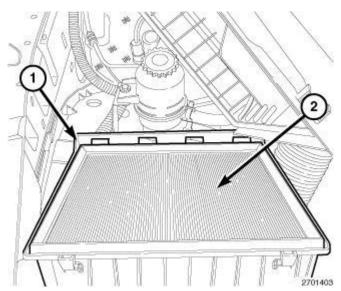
Air Cleaner Housing & Air Cleaner Filter Courtesy of CHRYSLER LLC
